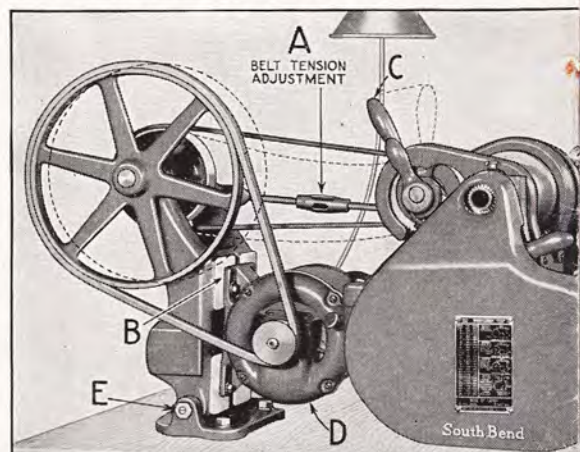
End View of "Workshop" Lathe with Adjustable Horizontal Motor Drive Countershaft
